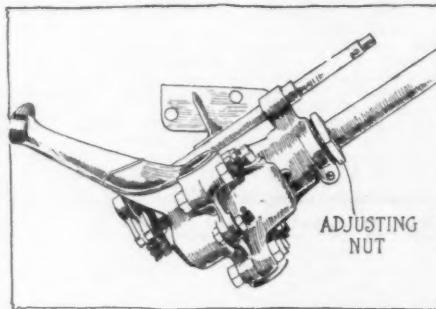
SHOWING ADJUSTING NUT OF E-M-F STEERING MECHANISM
